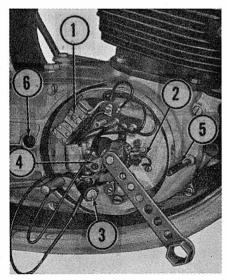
View of right side with cover removed. Refer to text for adjusting the ignition timing.
